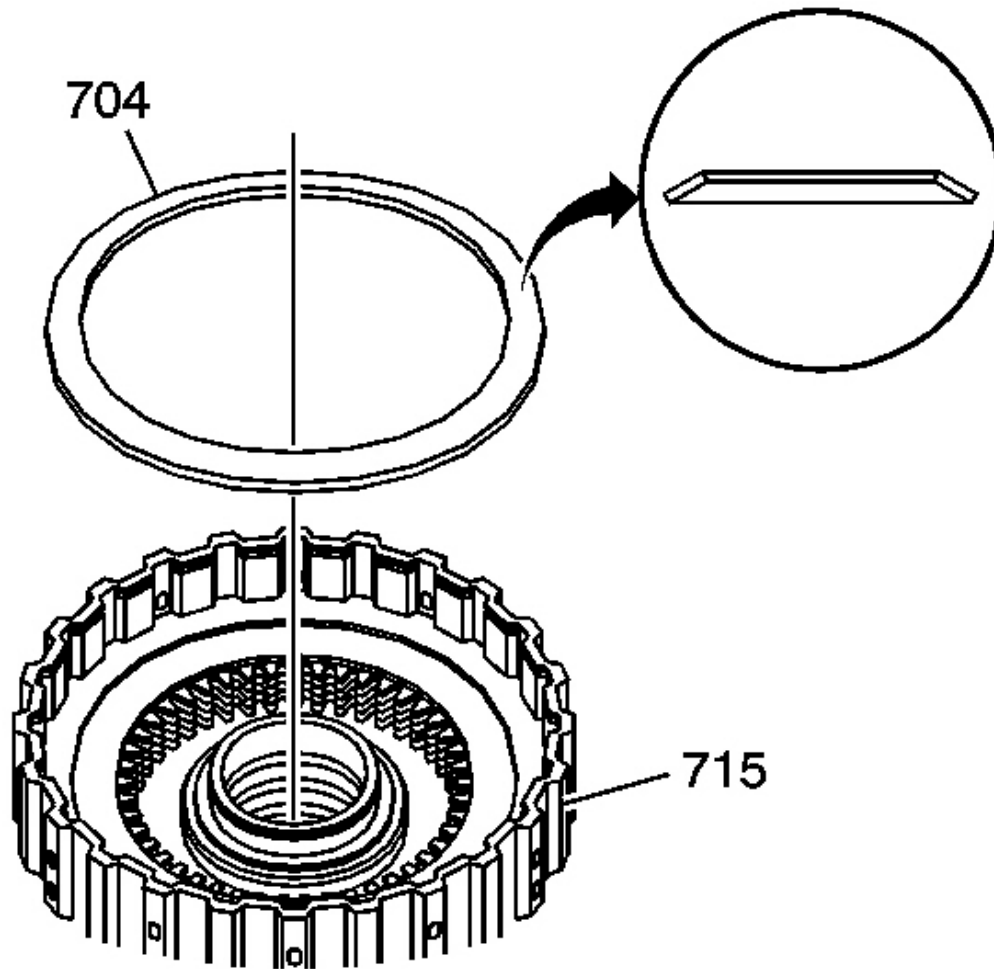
1st Clutch Spring Plate & 1st Clutch Piston
